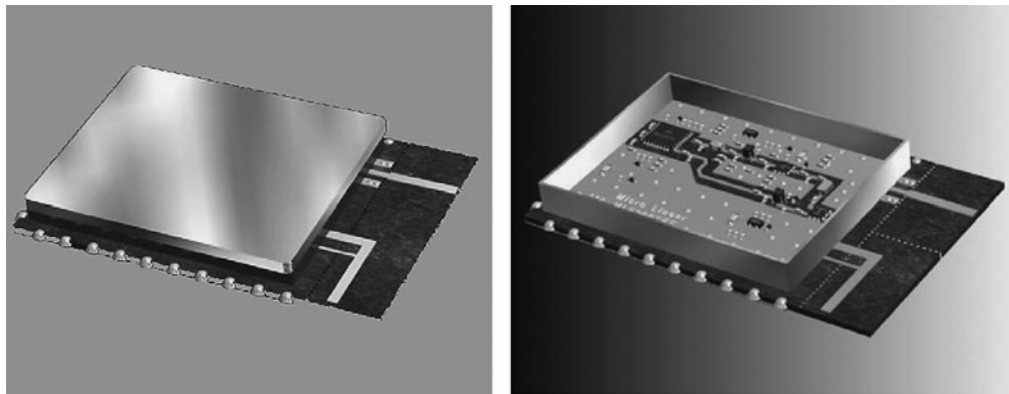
An RF PCB module with a shield's side walls and removable top cover, and with its top cover removed. (There are many single piece shields, without the separate removable top cover, available.)
